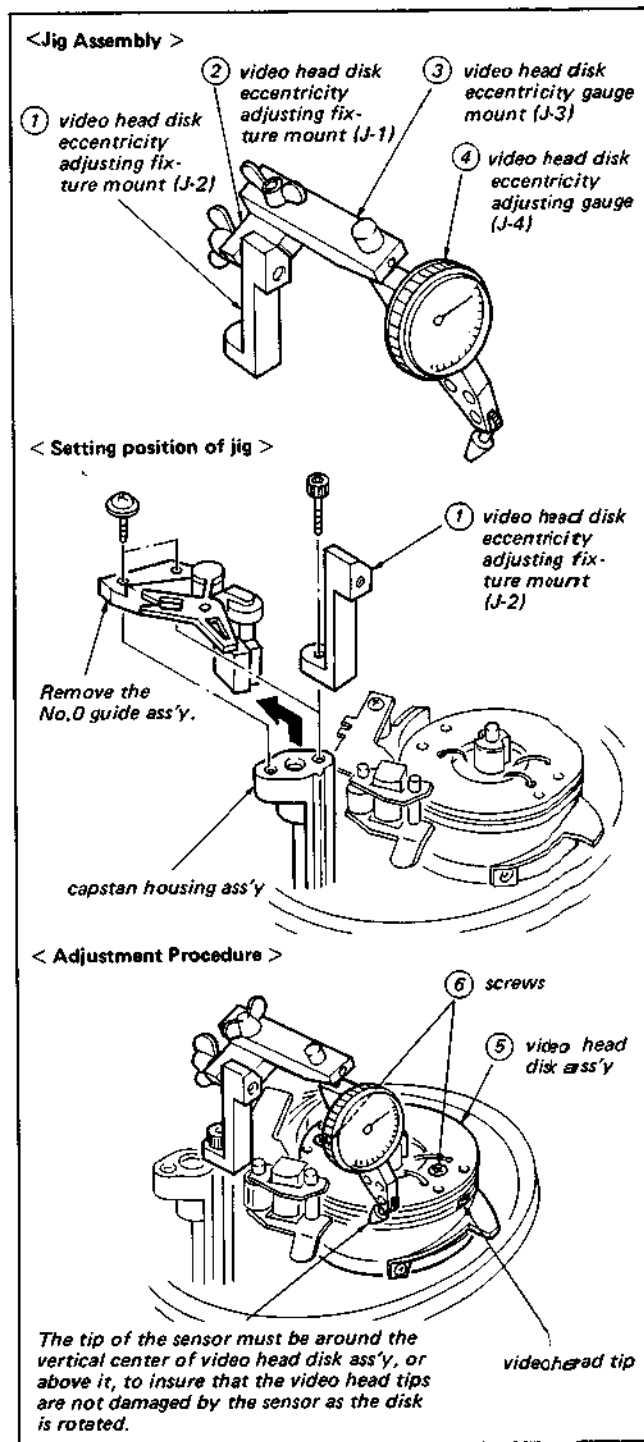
Eccentricity adjustment of the video head disk assembly
